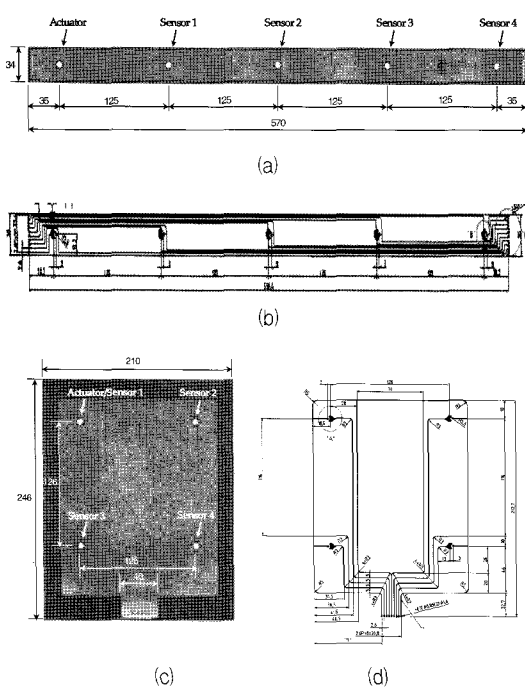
SAL-3: (a) dimension and (b) circuit design for strip type; (c) dimension and (d) circuit design for sheet type
